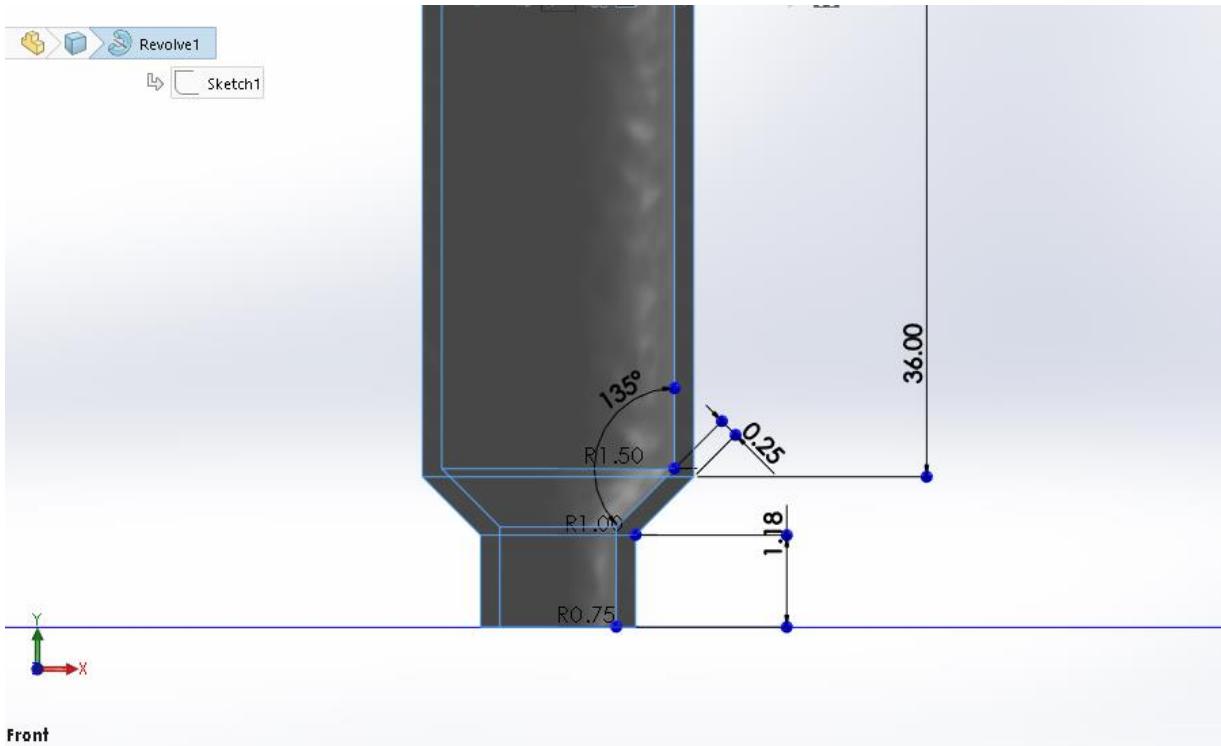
A: Initial Barrel Dimensions using Revolve Feature
